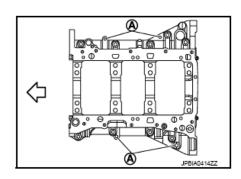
Lower Cylinder Block Bolts Loosening Sequence Courtesy of NISSAN MOTOR CO., U.S.A.
